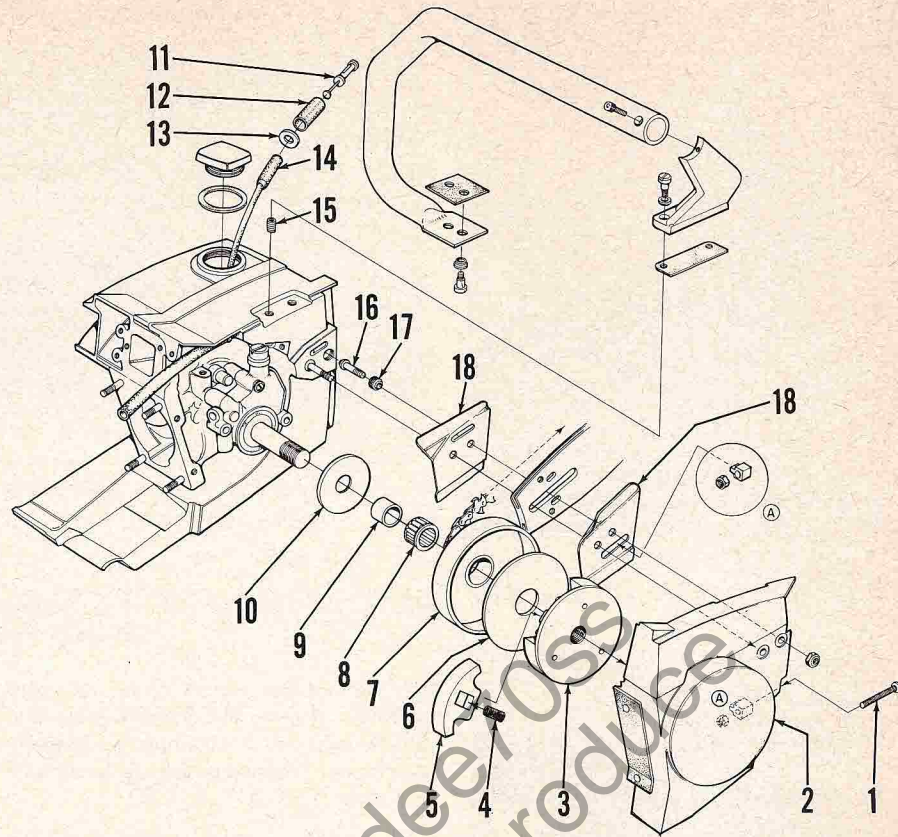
Exploded view showing clutch cover and chain tension adjustment, clutch and fuel tank (engine crankcase and fuel tank assembly). Clutch plate (3) is threaded to crankshaft (L.H. threads).
